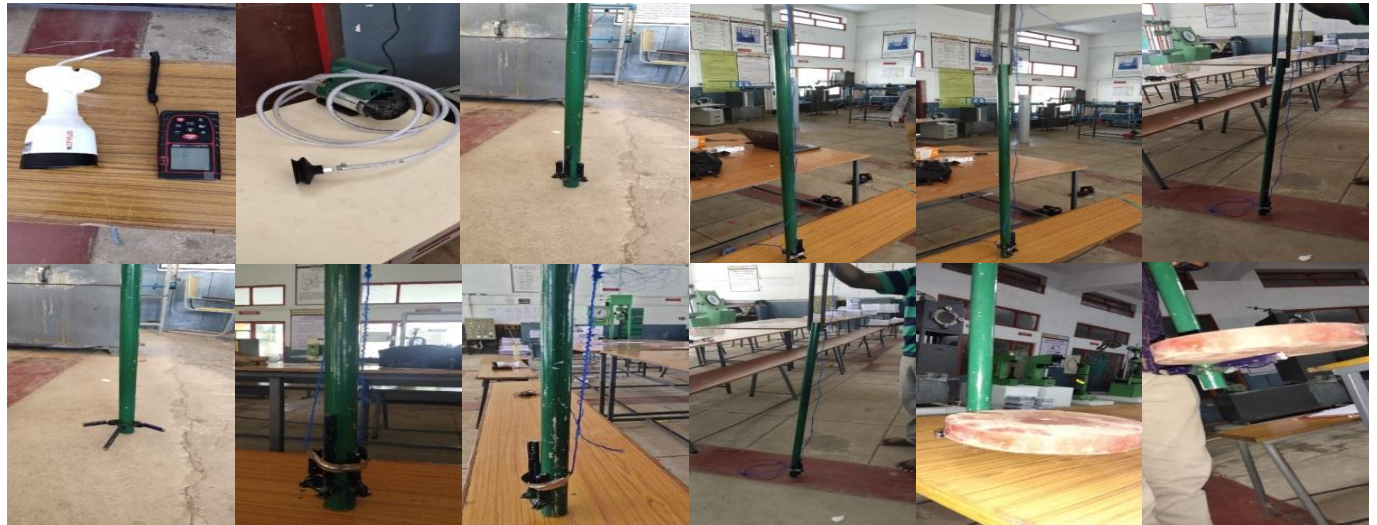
Fabrication of inspection, holding & supporting mechanism.
